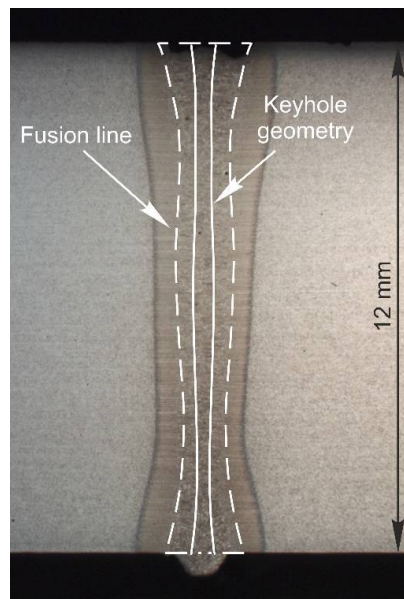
Cross-section of the weld and the used keyhole geometry in the CFD model.
